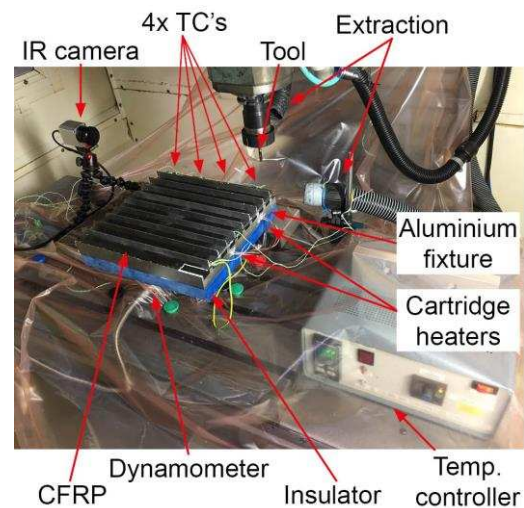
Machining setup detailing dynamometer, insulator, CFRP fixture, CFRP panel and bracket layers to make up the machining fixture with temperature controller, 4x cartridge heaters and 4x thermocouples with IR camera forming the temperature control and monitoring setup
